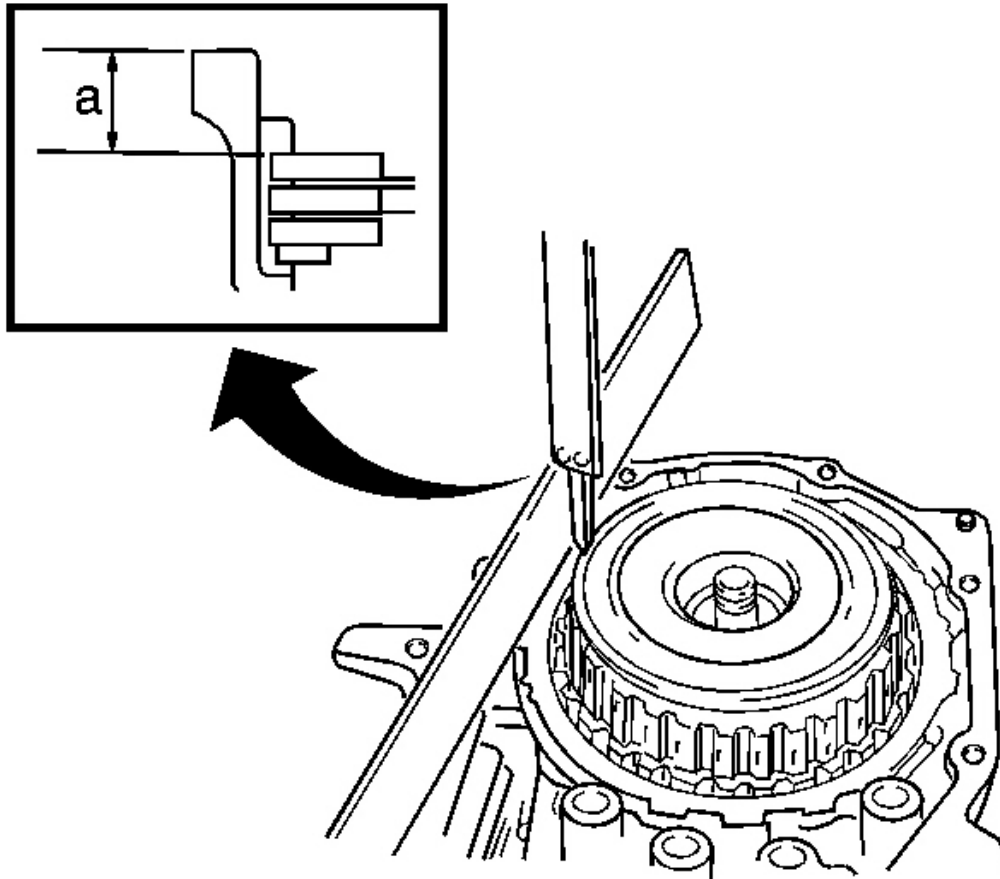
Measuring The Distance Between 2nd Coast & O/D Brake Flange Using Vernier Calipers
